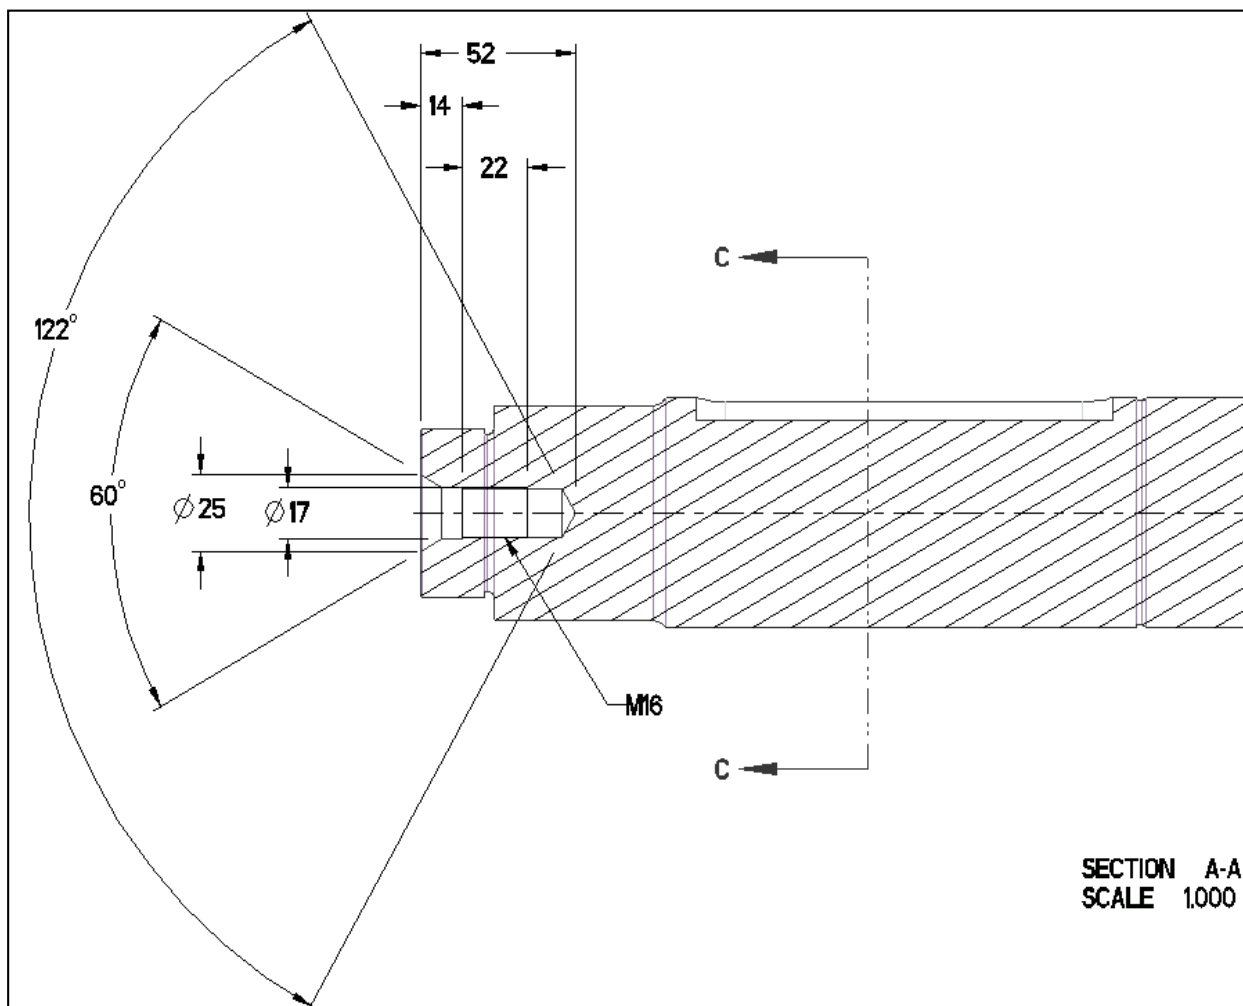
Coupling Shaft Drawing, Sheet Two, SECTION A-A Left Side
